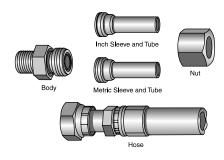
Seal-Lok Xtreme works with inch or metric tube and hose
